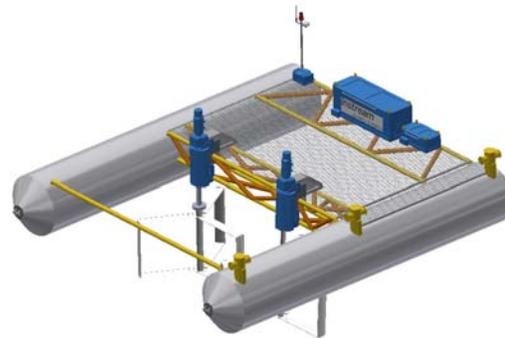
, THE GENERAL ASSEMBLY DRAWING OF THE TDU FOLLOWING THE PRELIMINARY DESIGN PROCESS
